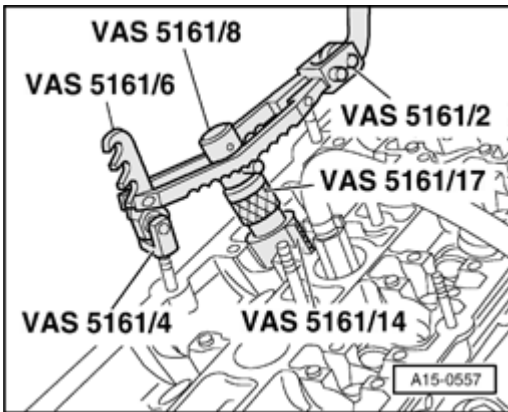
Screwing Snap-In Device VAS5161/6 With Attaching Fork VAS5161/4 Onto Stud On Cylinder Head
